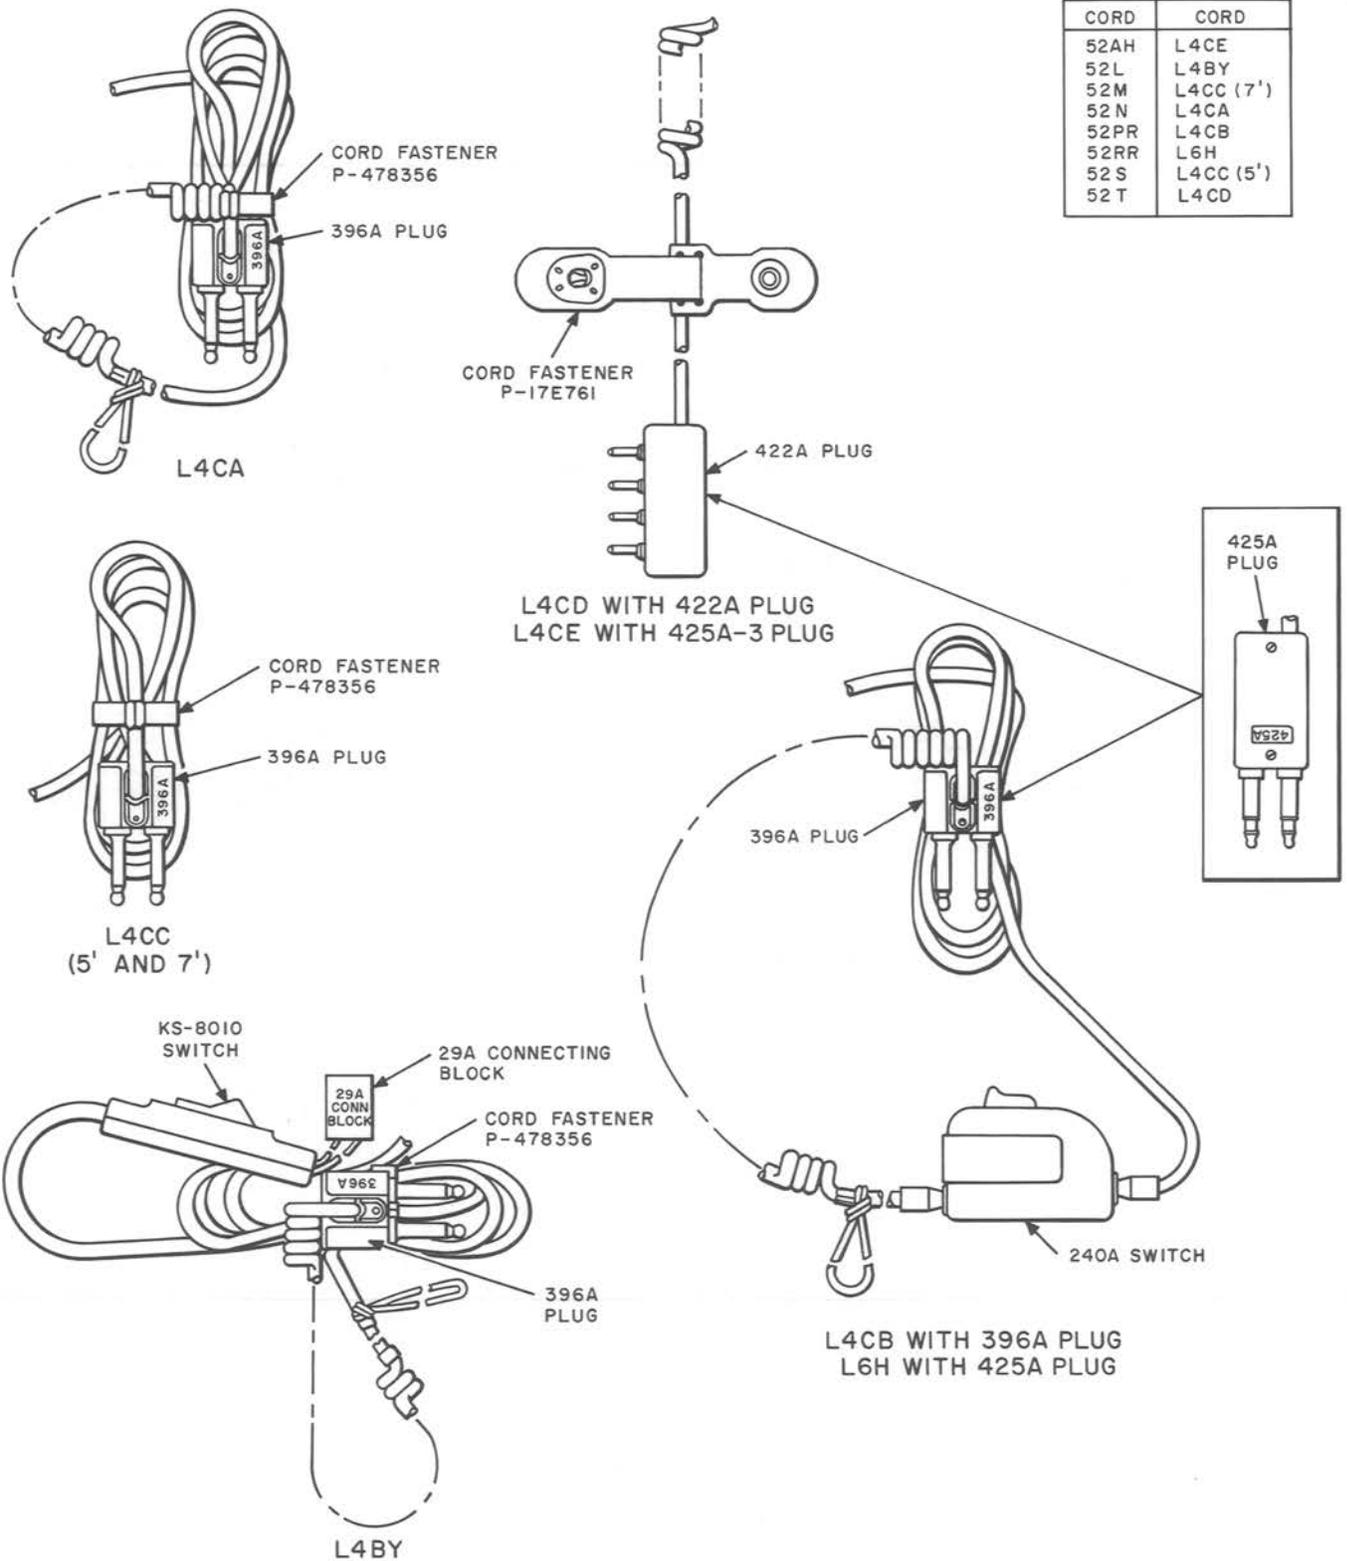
Cords and Switches Used with 52-Type Head Telephone Sets Except 52E Cord Assembly
